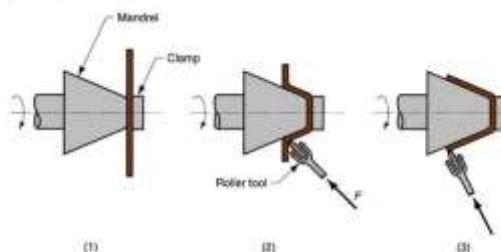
Metal Spinning used roller too; (1) Sheet metal Clamped to the machine; (2) Roller metal is used to shape the sheet by applying pressure upon sheet against mandrel; (3) Deriving complete shape.
